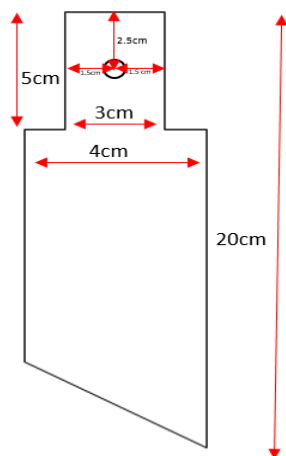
shows the side view of the locally manufactured triangular blades (T3).
